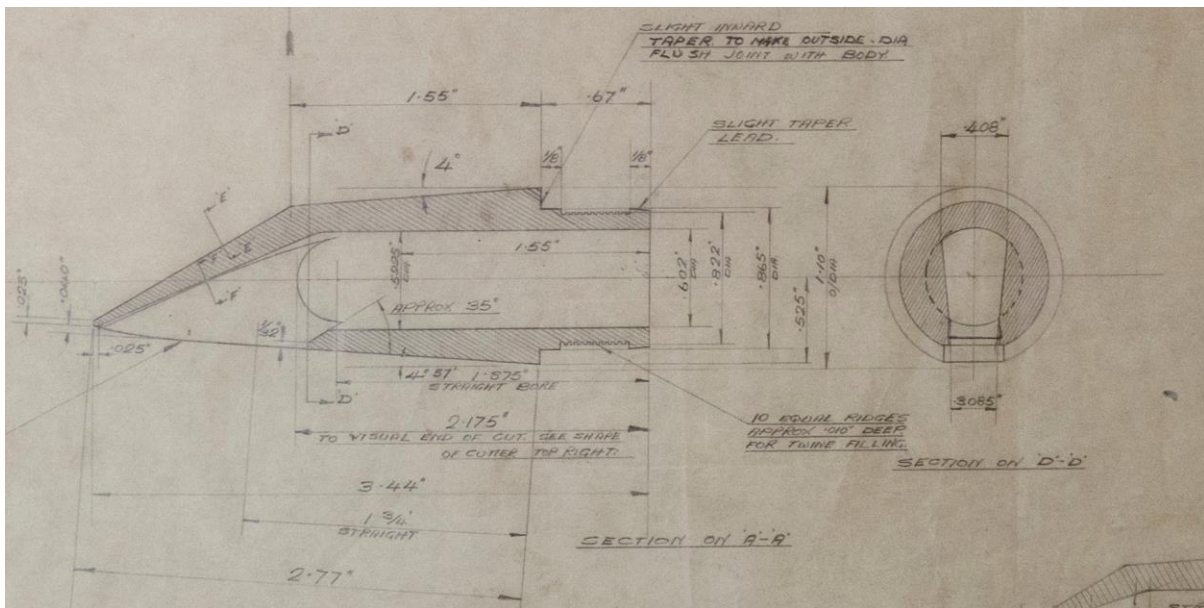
Technical drawing for 1943 Bb Boehm 1010 mouthpiece (detail)
